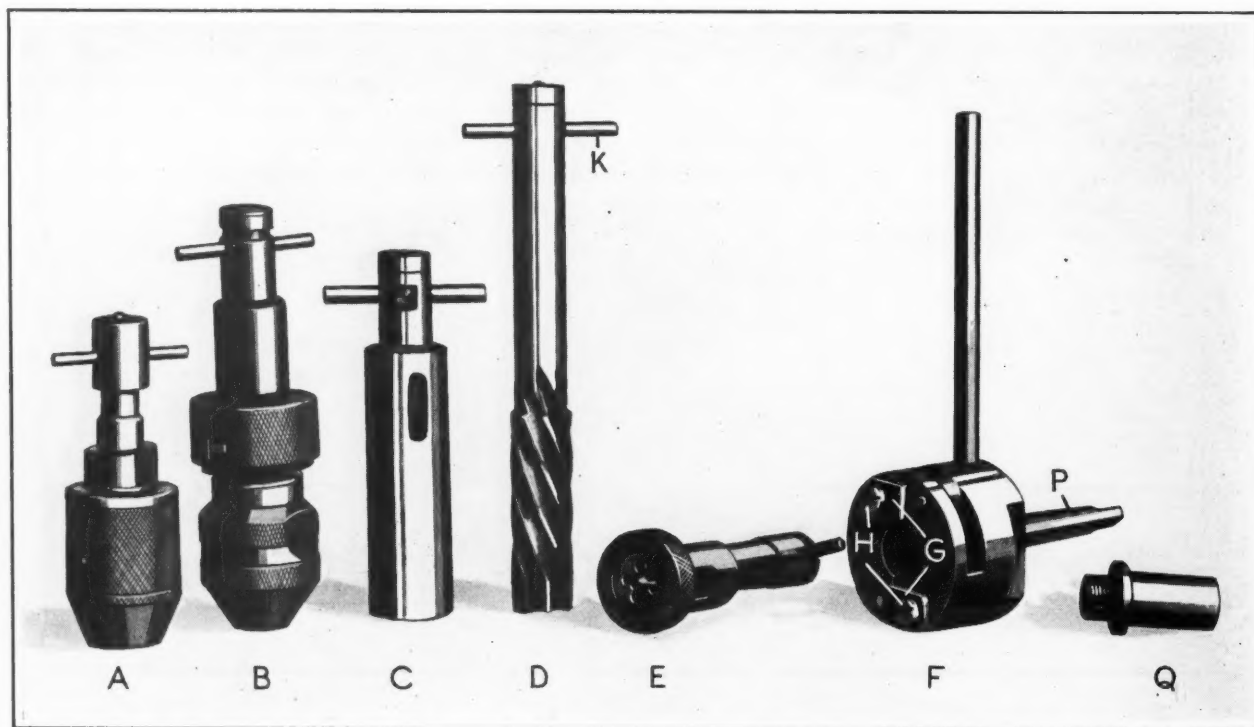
Quick-change Tool-holder and Some of the Tools and Chucks Used for Light Production Work
